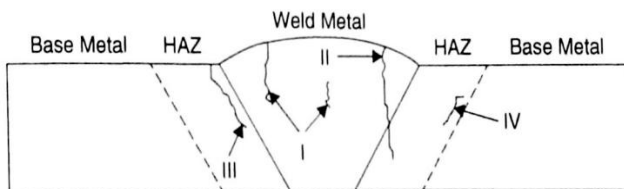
Schematic representation of the four different type of cracks within a weld and their typical position.⁶
